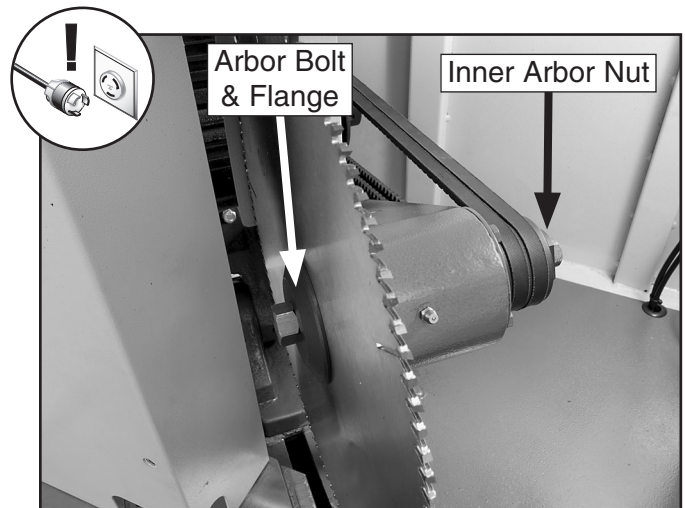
Blade arbor bolt, flange, and nut (left side shown).
